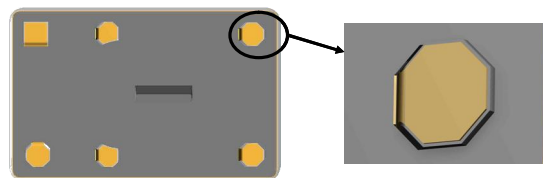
Assembly of top and bottom part closes the Cu tracks around the magnet and puts together both parts of the EMI filter
